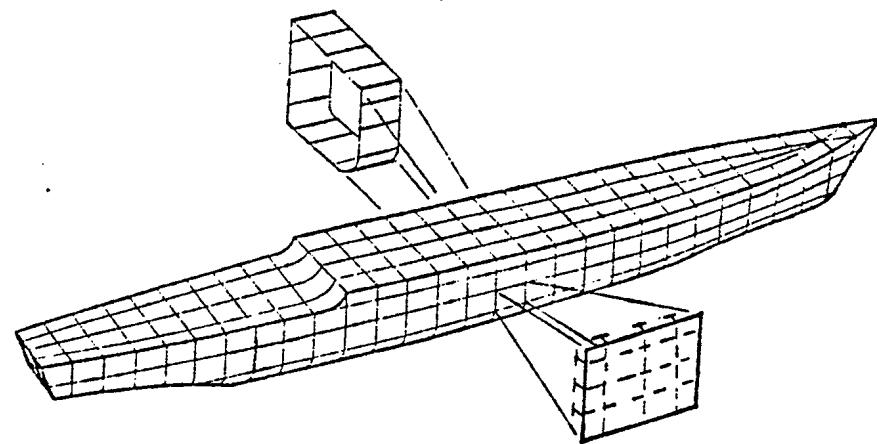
An Assembly Of Panelled Sections Forming A Complete Hull
